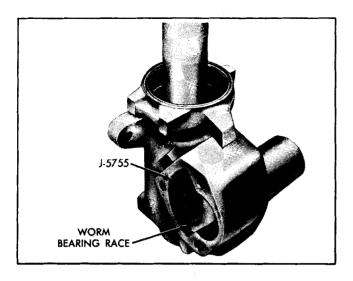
Install Wormshaft Bearing Race in Housing Using Tool J 5755
